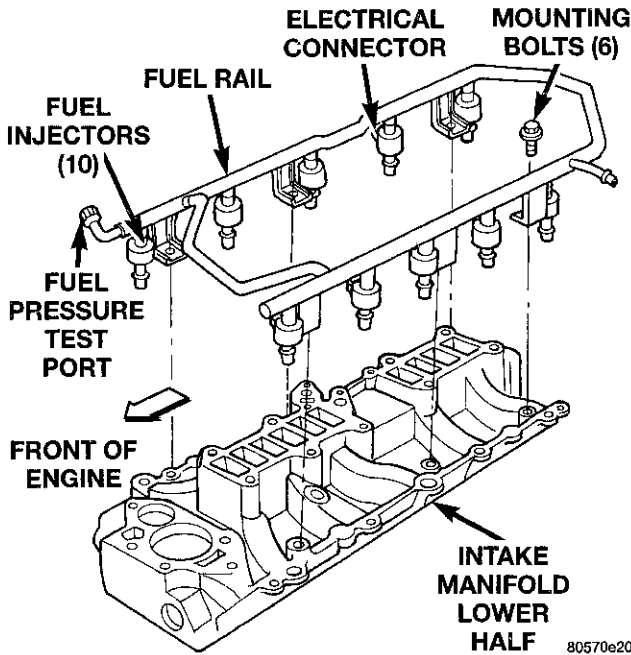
Fuel Rail Mounting Bolts—8.0L V-10 Engine—Typical
